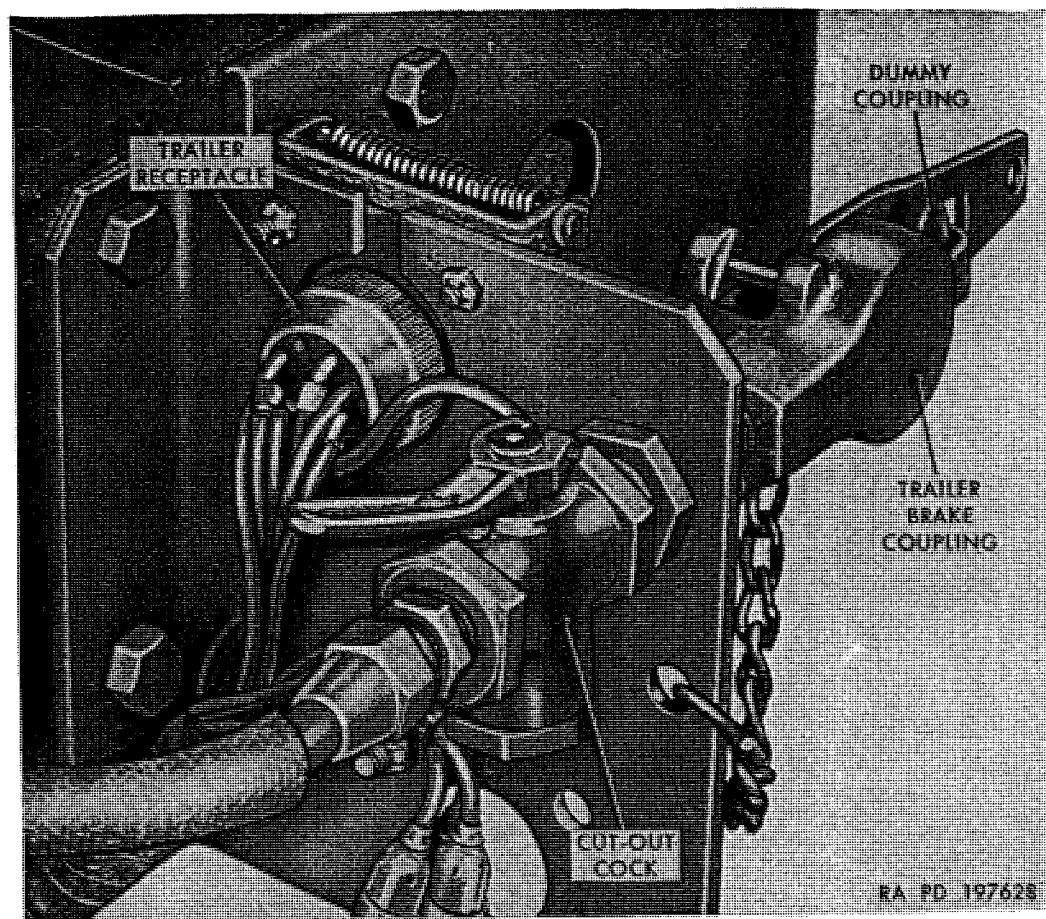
Trailer brake coupling and cutout cock installed at rear of frame (left side shown).
